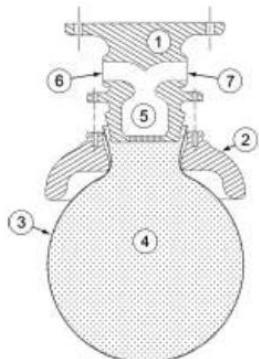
Assembly drawing of the positive pressure jamming gripper, including components: 1) base, 2) external collar, 3) balloon membrane, 4) coffee grains, 5) air filter, 6) vacuum line port, and 7) high pressure port. The balloon is pinched between the base and the collar producing an airtight seal
